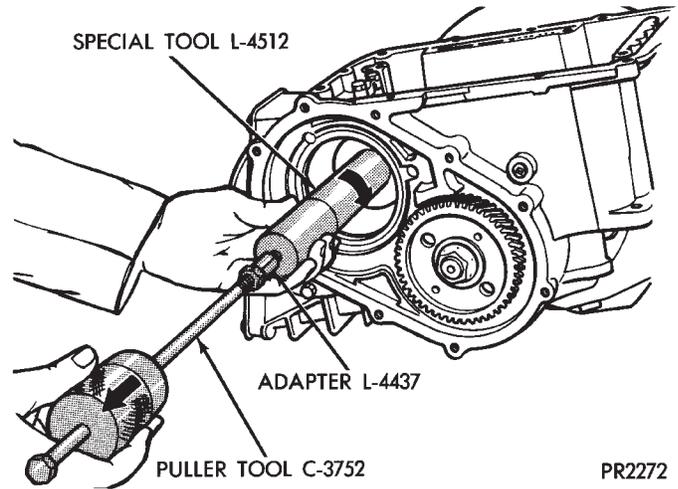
Install Transfer Shaft Gear Bearing Cone
